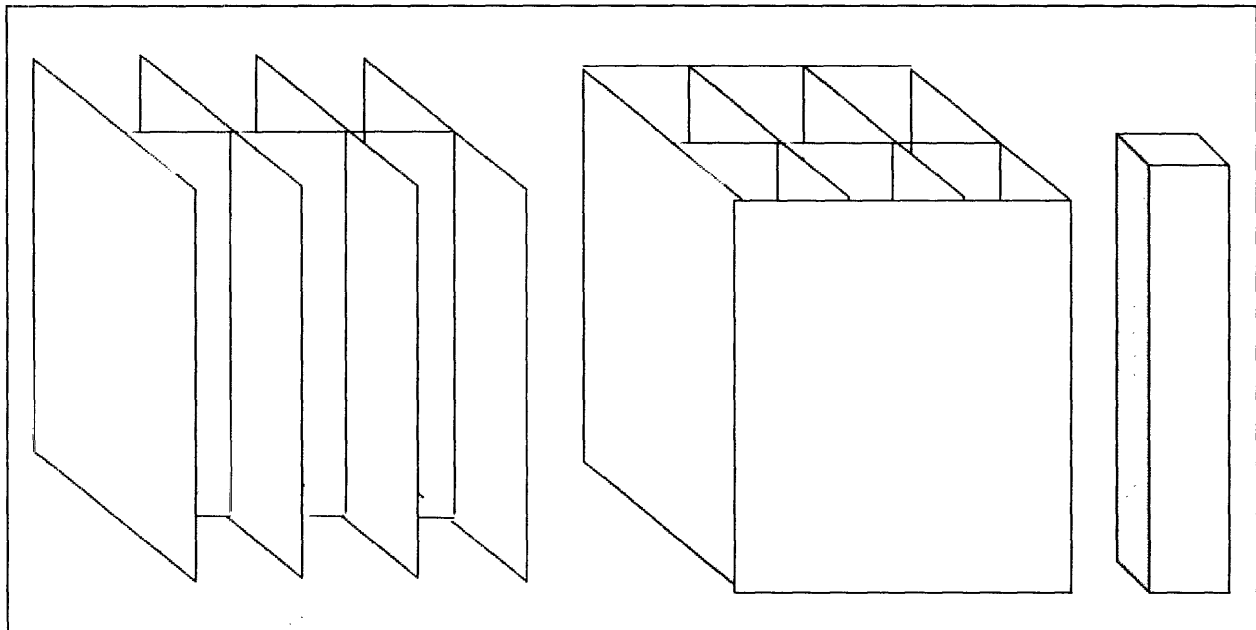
Rough sketch of final design: channels open, channels closed, and the piston.
